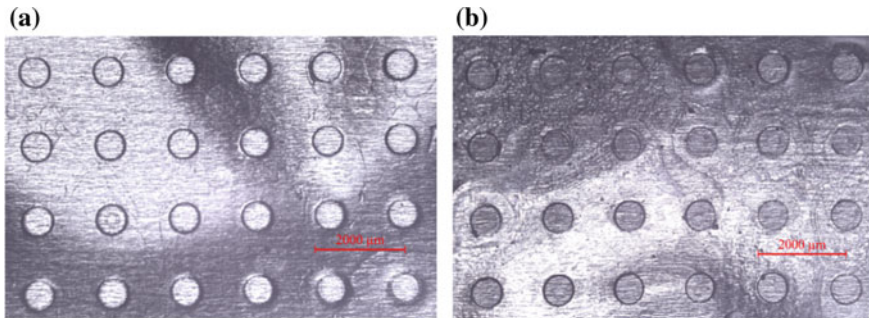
Masked tool a before machining and b after machining of twenty-five times
